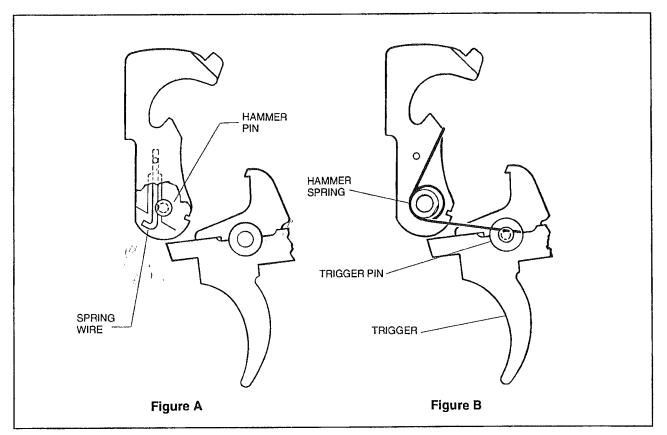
HAMMER SPRING AND TRIGGER PIN INSTALLATION
